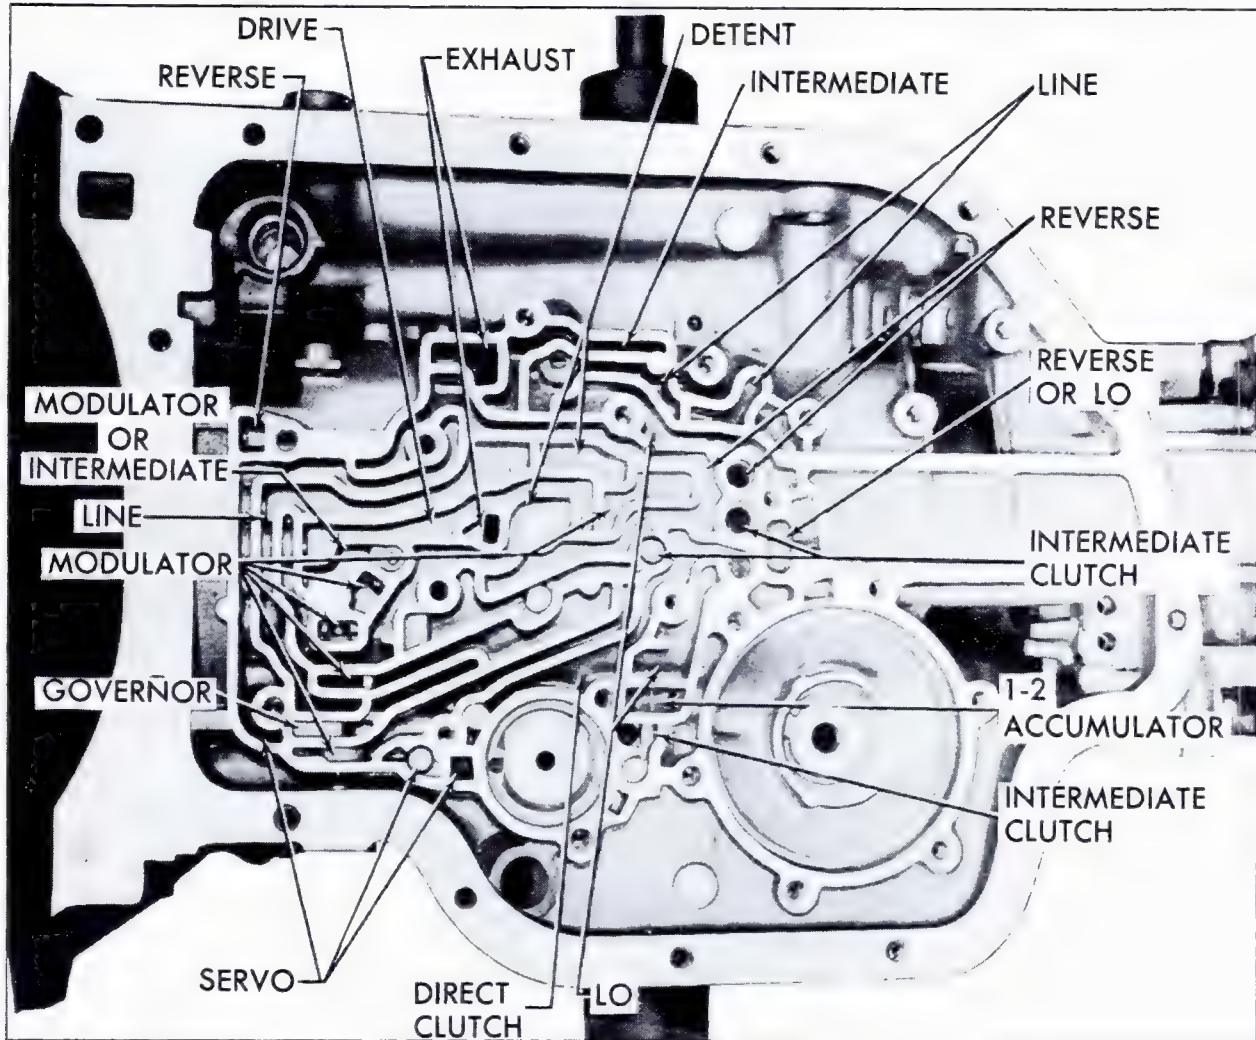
AA and AB Transmission Case Oil Passages - Bottom View
